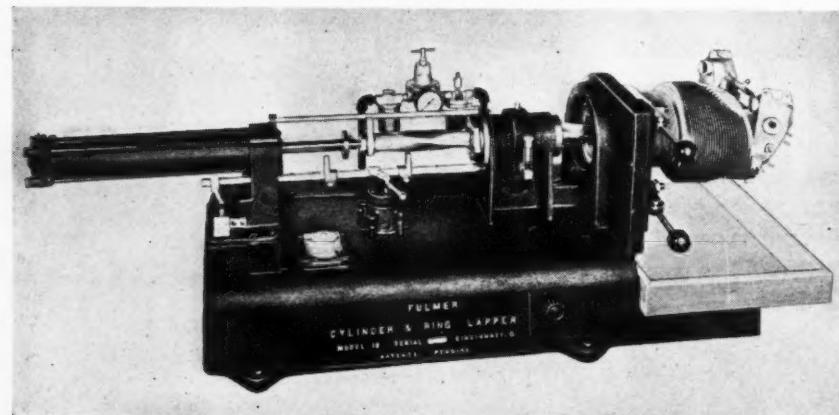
Fulmer Air-operated Piston-ring Lapping Machine
